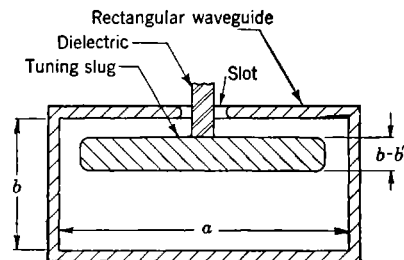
Dimensions for calculation of impedance of slug tuner.
